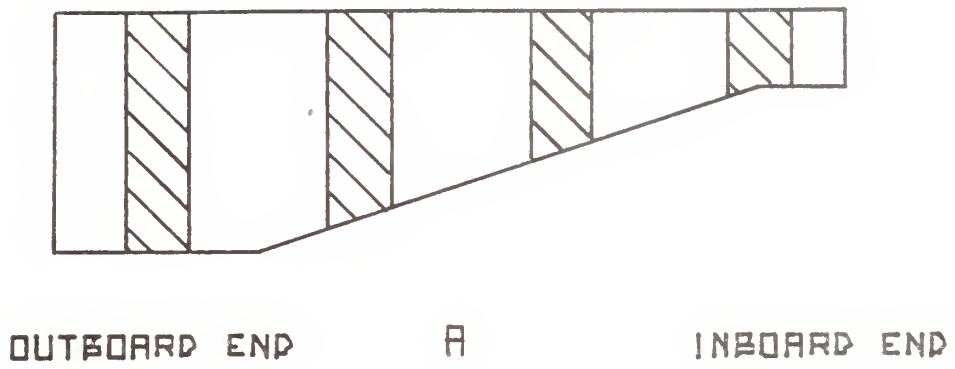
PERMISSIBLE JOINT CROSS SECTIONS
